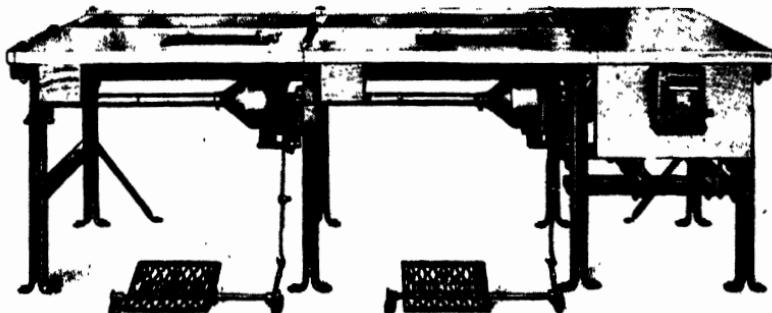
Sewing machines with inclosed shafting and drive mechanism. (*Courtesy of the Singer Sewing Machine Company.*)
